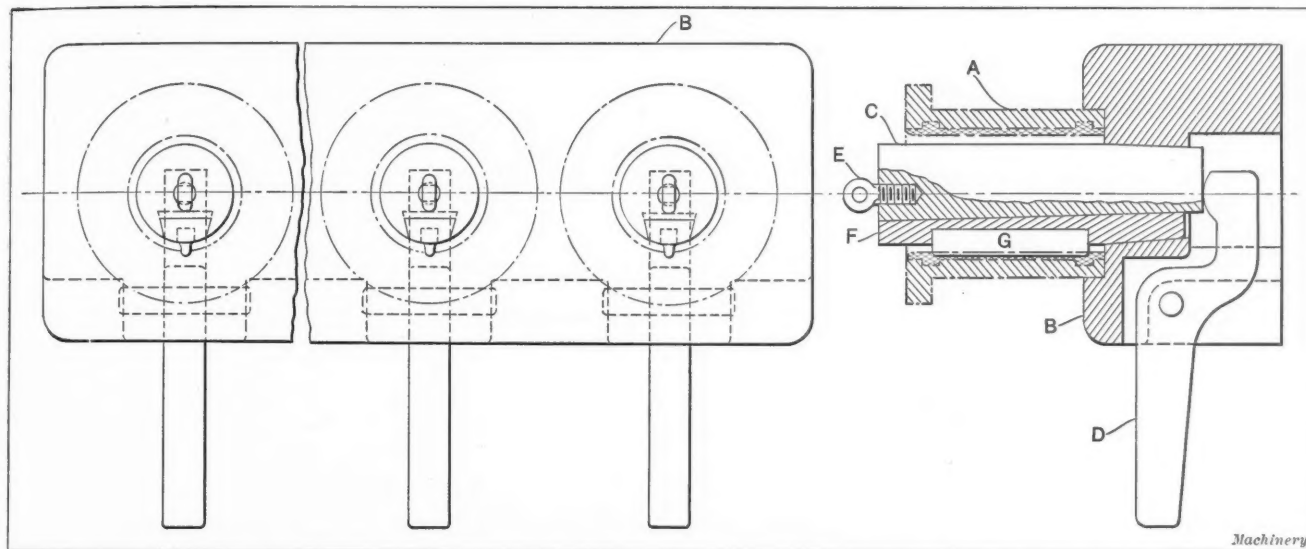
Fixture equipped with Four Mandrels for babbitting Bearings with Straight Oil Groove
